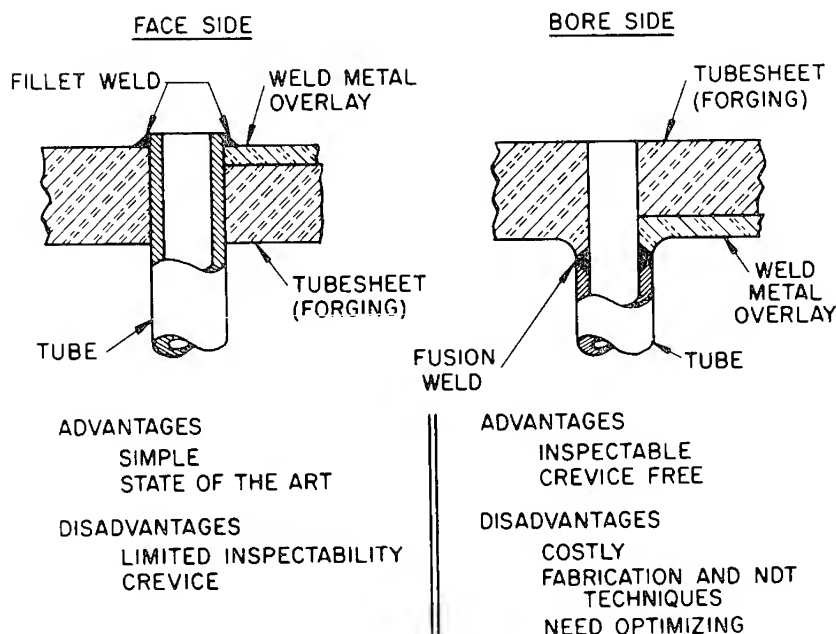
Tube-to-tubesheet welds for LMFBR intermediate heat exchangers and steam generators.
